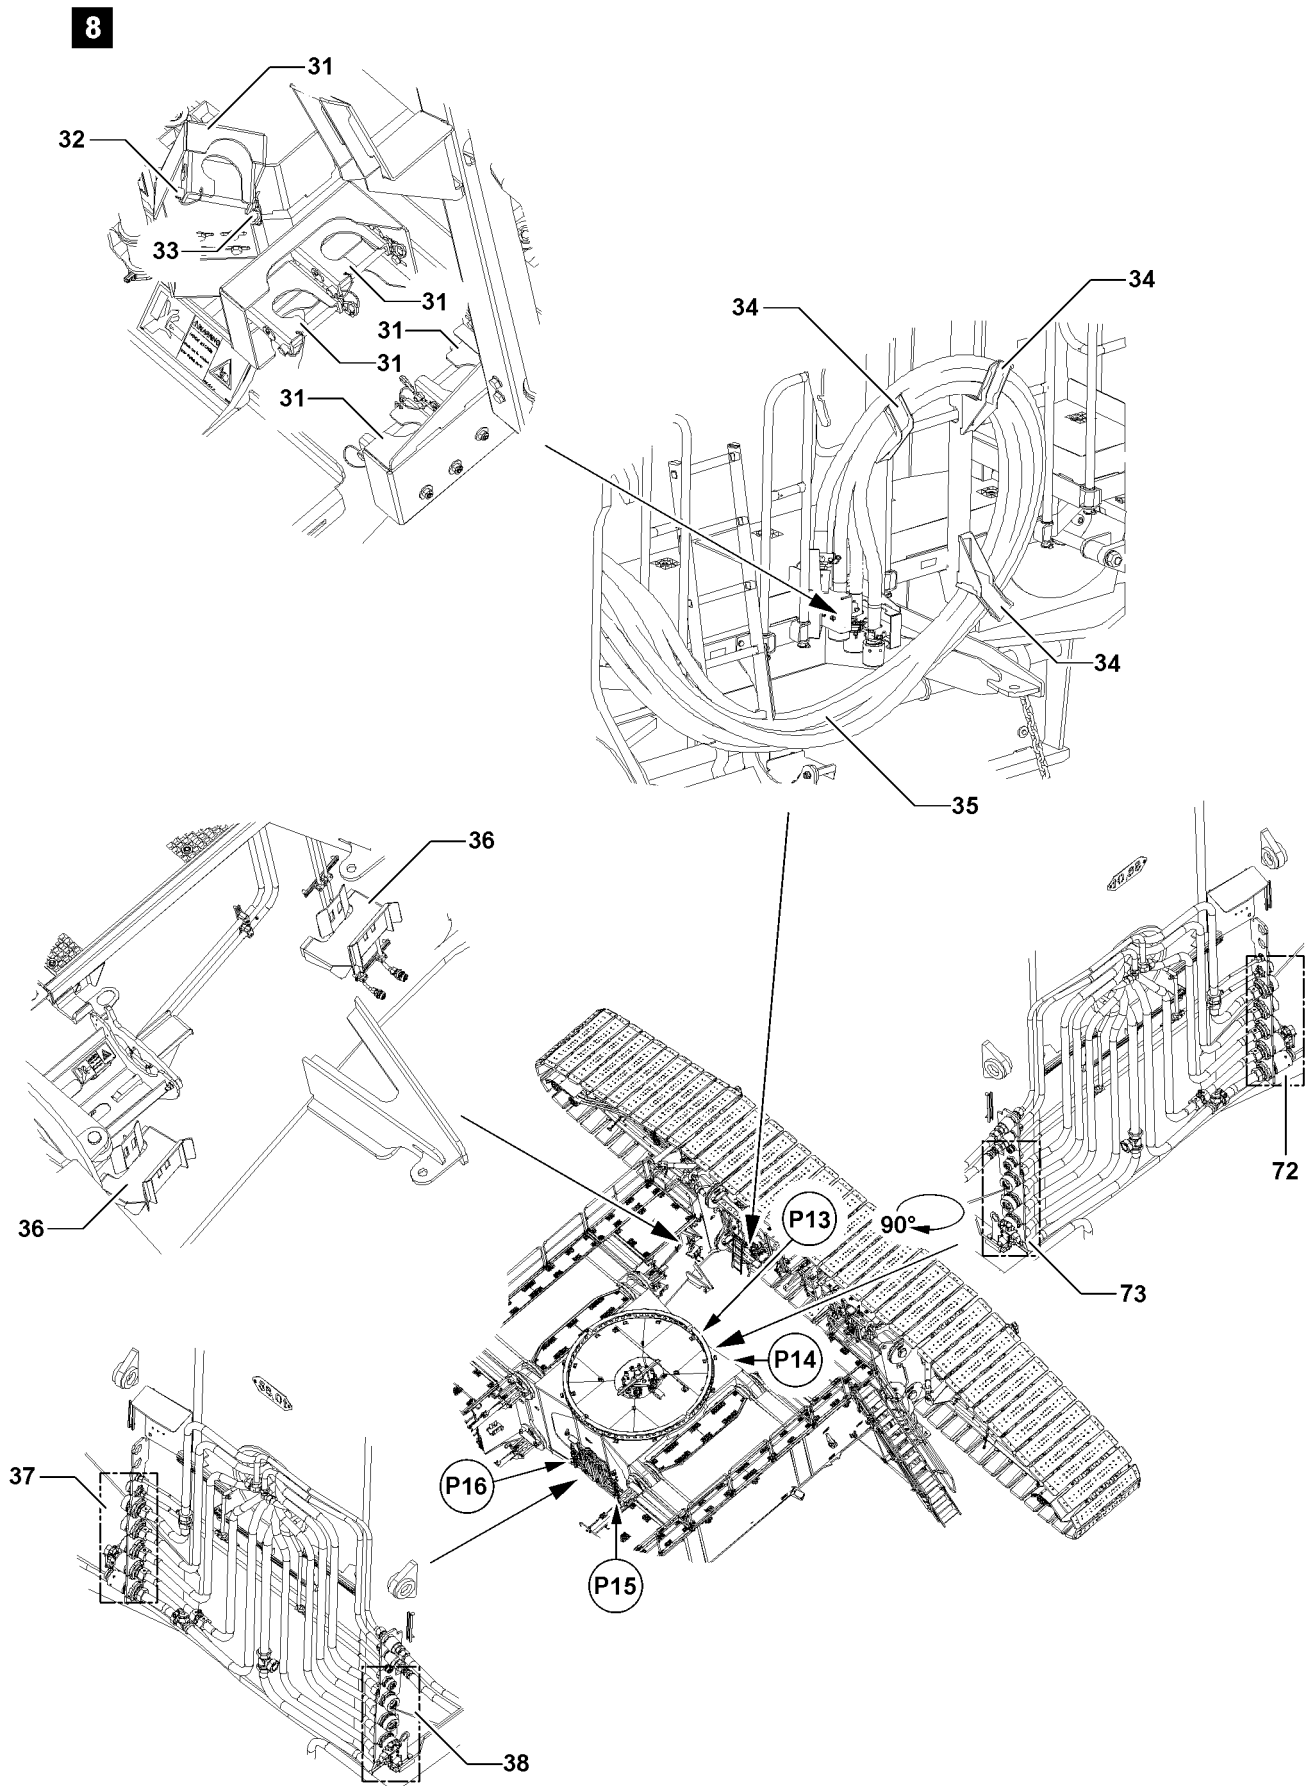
Disconnecting the hydraulic connection from the crawler carriers
